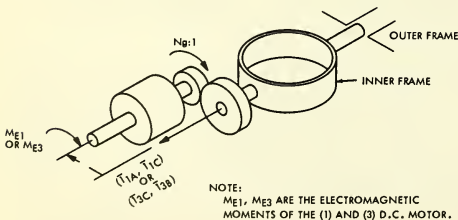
SCHEMATIC OF (1) OR (3) PIVOT TORQUE MOTOR
